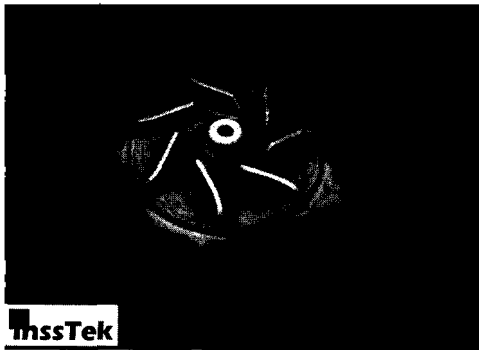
Air-metal impeller part by DMD process(courtesy of Insstek Inc.).
